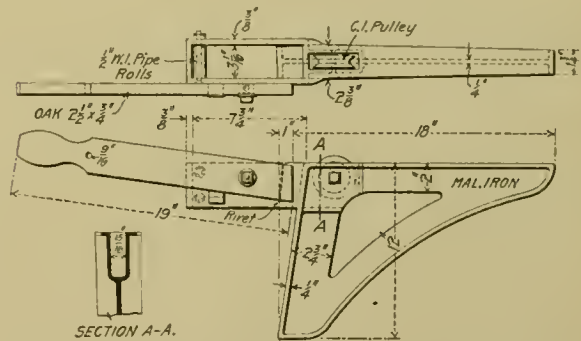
DETAILS OF THE ADJUSTABLE SCAFFOLD SYSTEM FOR THE USE OF THE CAR PAINTERS IN THE PAINT SHOP.
